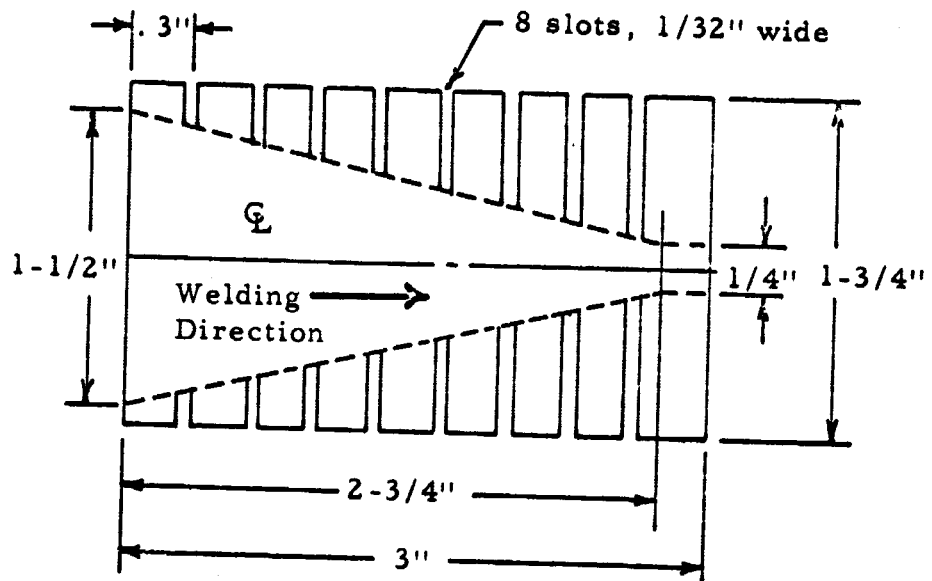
HOULDCROFT TEST SPECIMEN
